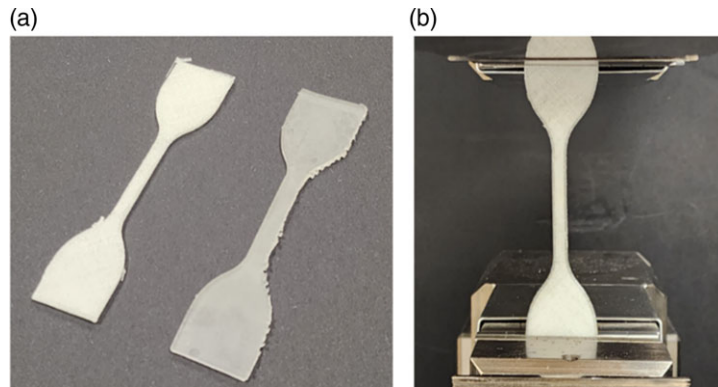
Mechanical testing (A) Specimens and (B) Tensile test setup
